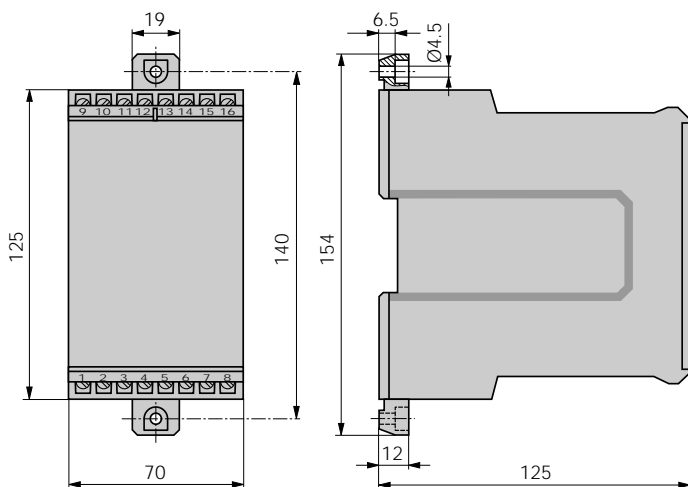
Ziegler P11 in housing E16 with the screw hole brackets pulled out for wall mounting.
